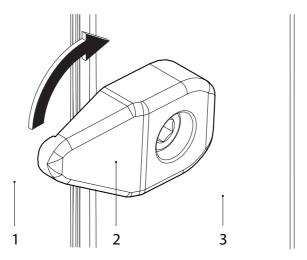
Panel fixing knob 1 - removable panel, 2 - fixing knob, 3 - unit frame
